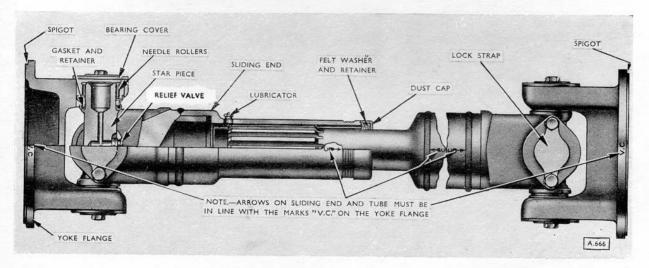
Section through propeller shaft—needle roller bearing type joints.
